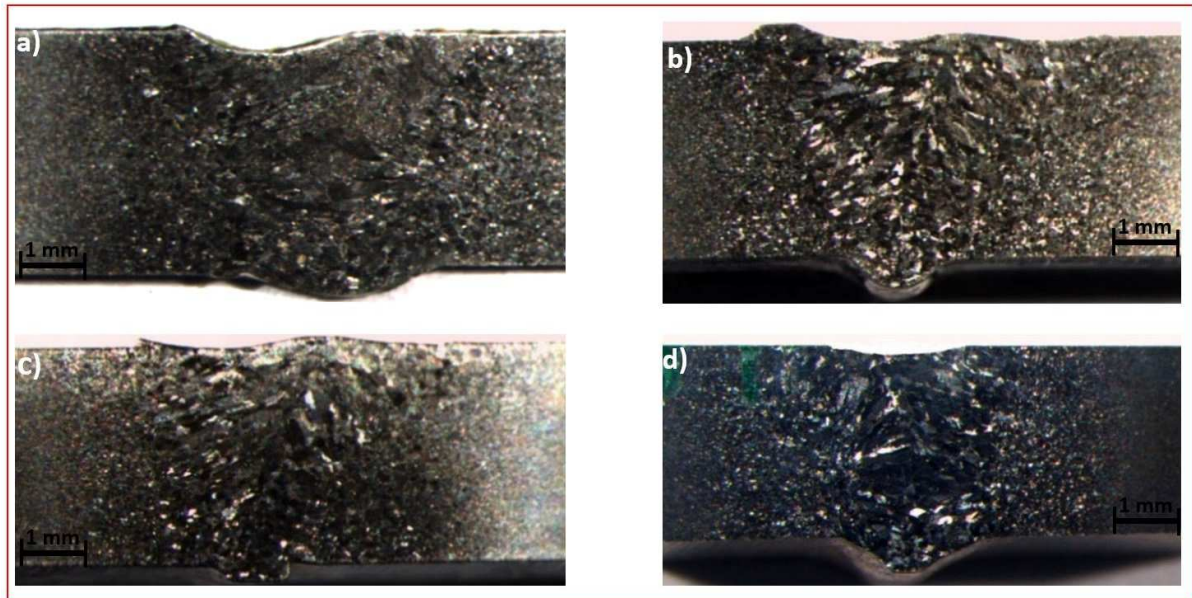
Macrographs of the weld samples: a) Joint 1, b) Joint 2, c) Joint 3, and d) Joint 4.
